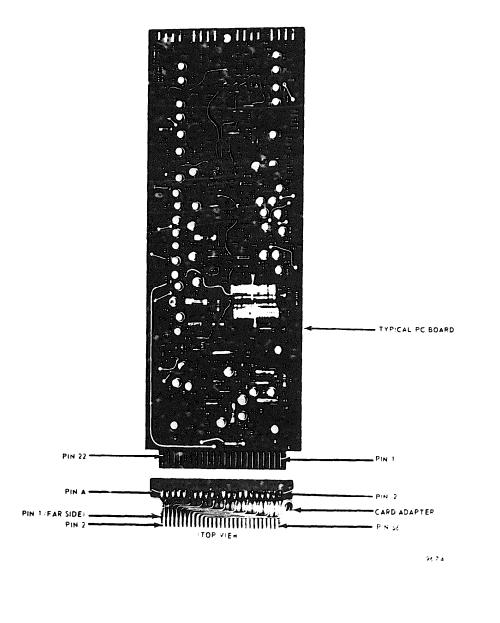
, Printed Circuit Card Adapter MX-9091/USM-371 22 Pin SN-394 (Red)
